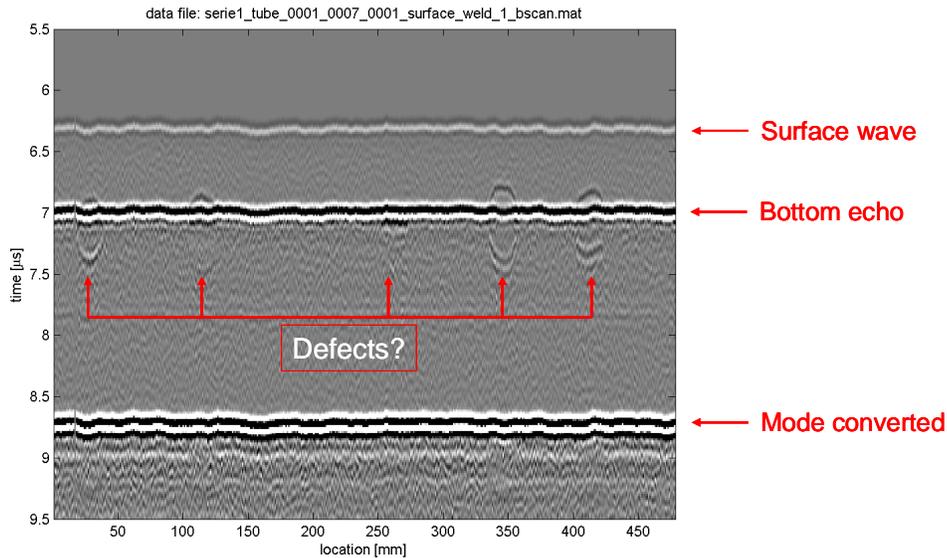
Simulated TOFD B-scan image for a number of defects, i.e. weld root fatigue cracks.
